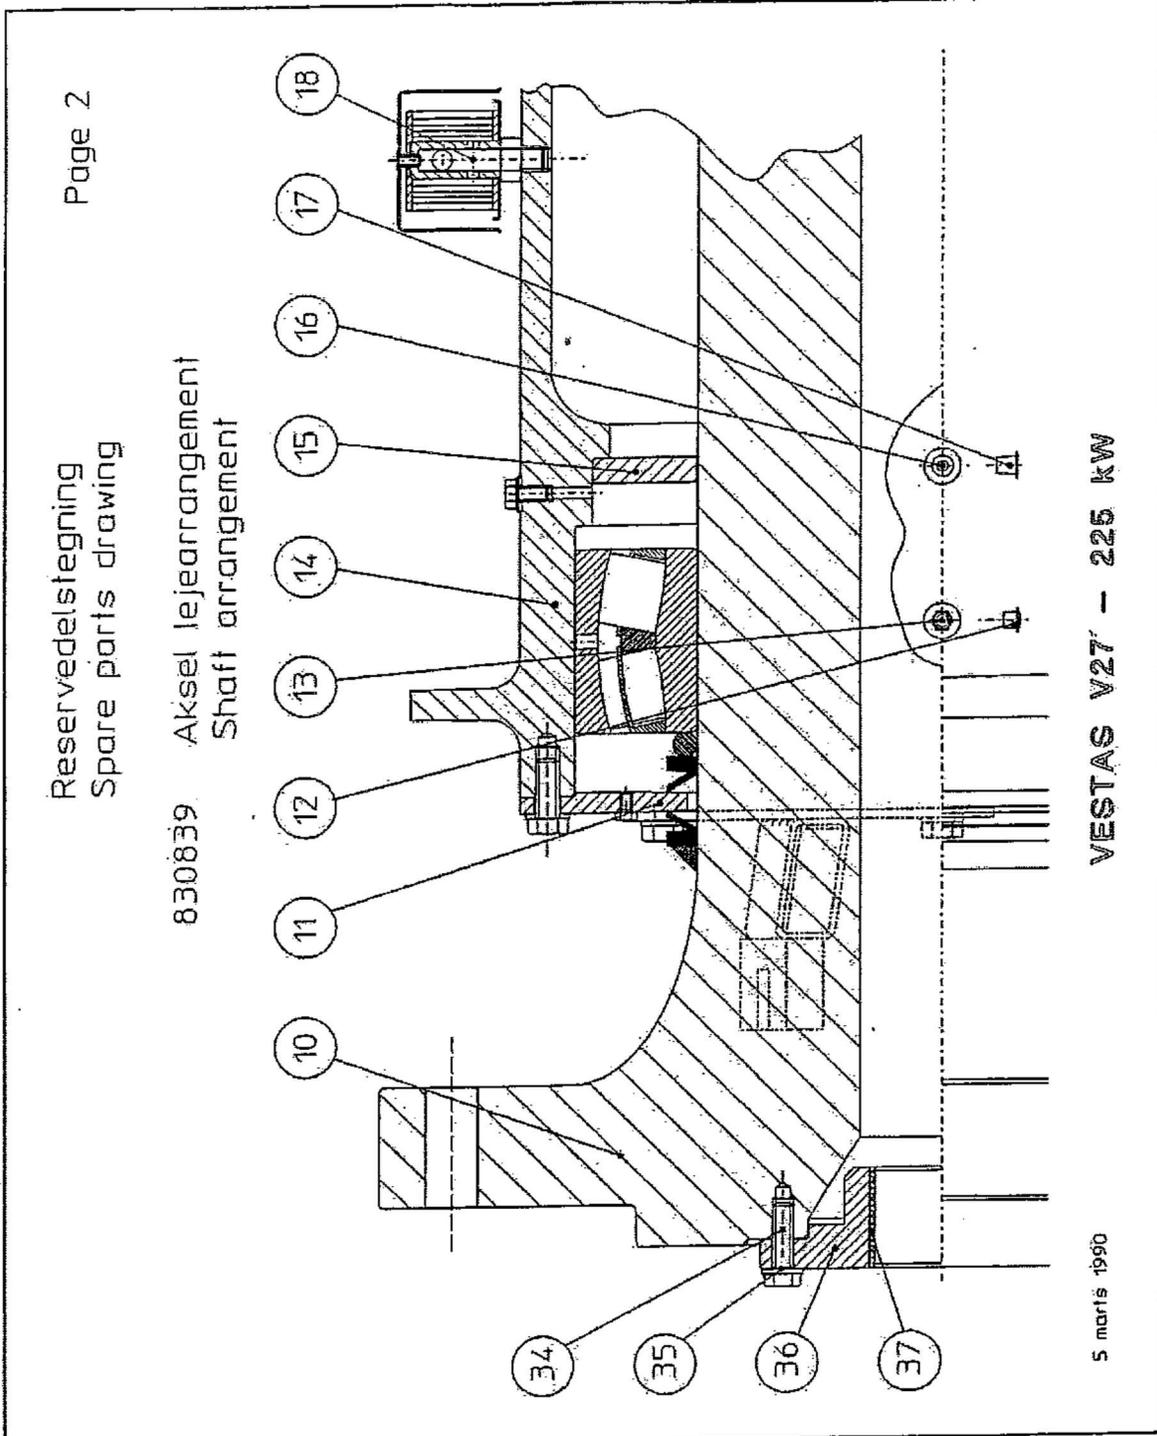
Spare parts drawing, main shaft assembly, V27, front roller bearing and cover
